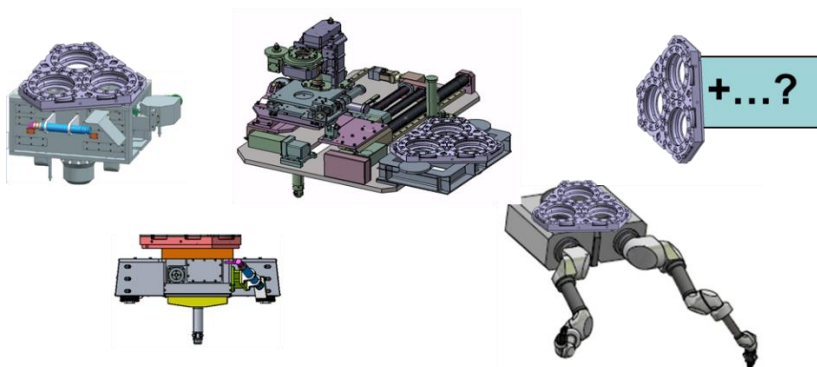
BRHS equipped with an example of tool changer and F/T sensor
